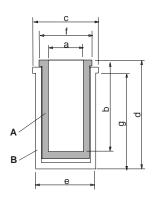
detail of the plaque, with the details of an F9-D melting machine.
